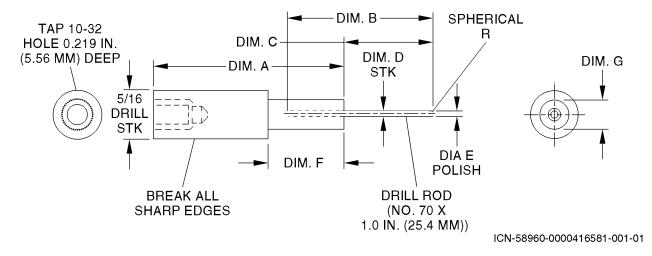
Contact Seating Inspection Kit Contact Adapter, T3009406-8
